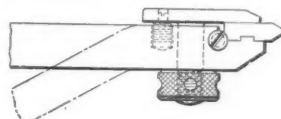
Threading Tool-holder for Screw for Adjusting Cutter.
